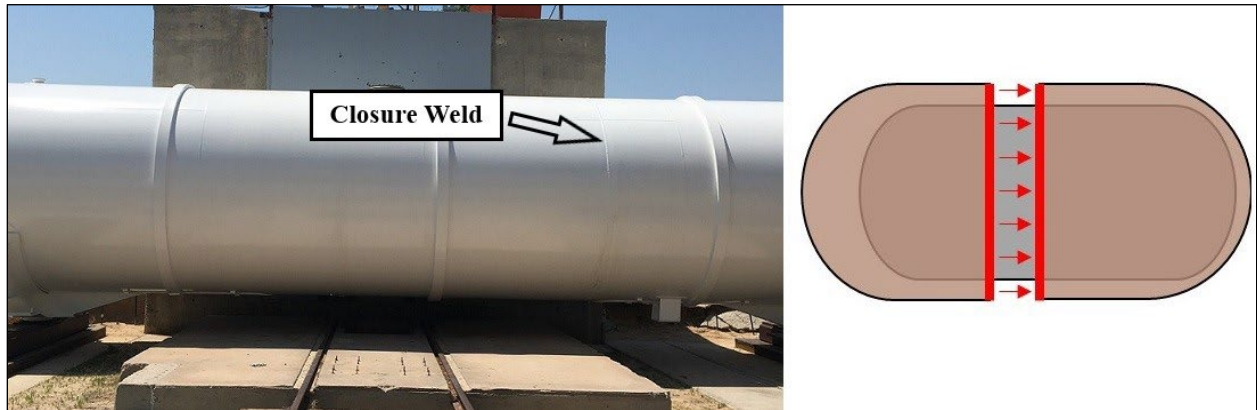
Photo of Closure Weld (left) and Diagram of Nesting Process (right)
